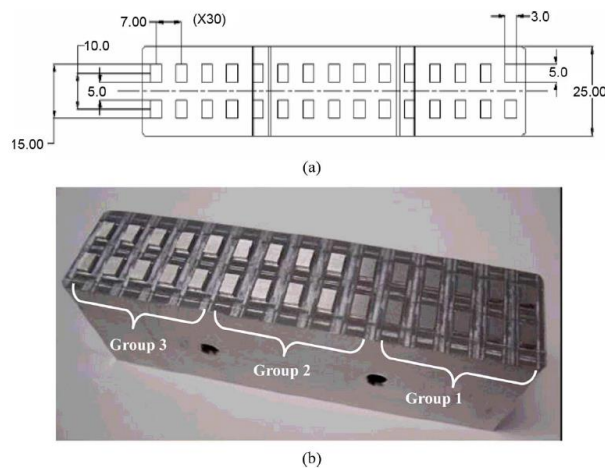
Workpiece for studying the effect of machining parameters. (a) Dimension of the workpiece design (unit: mm). (b) Machined workpiece.
